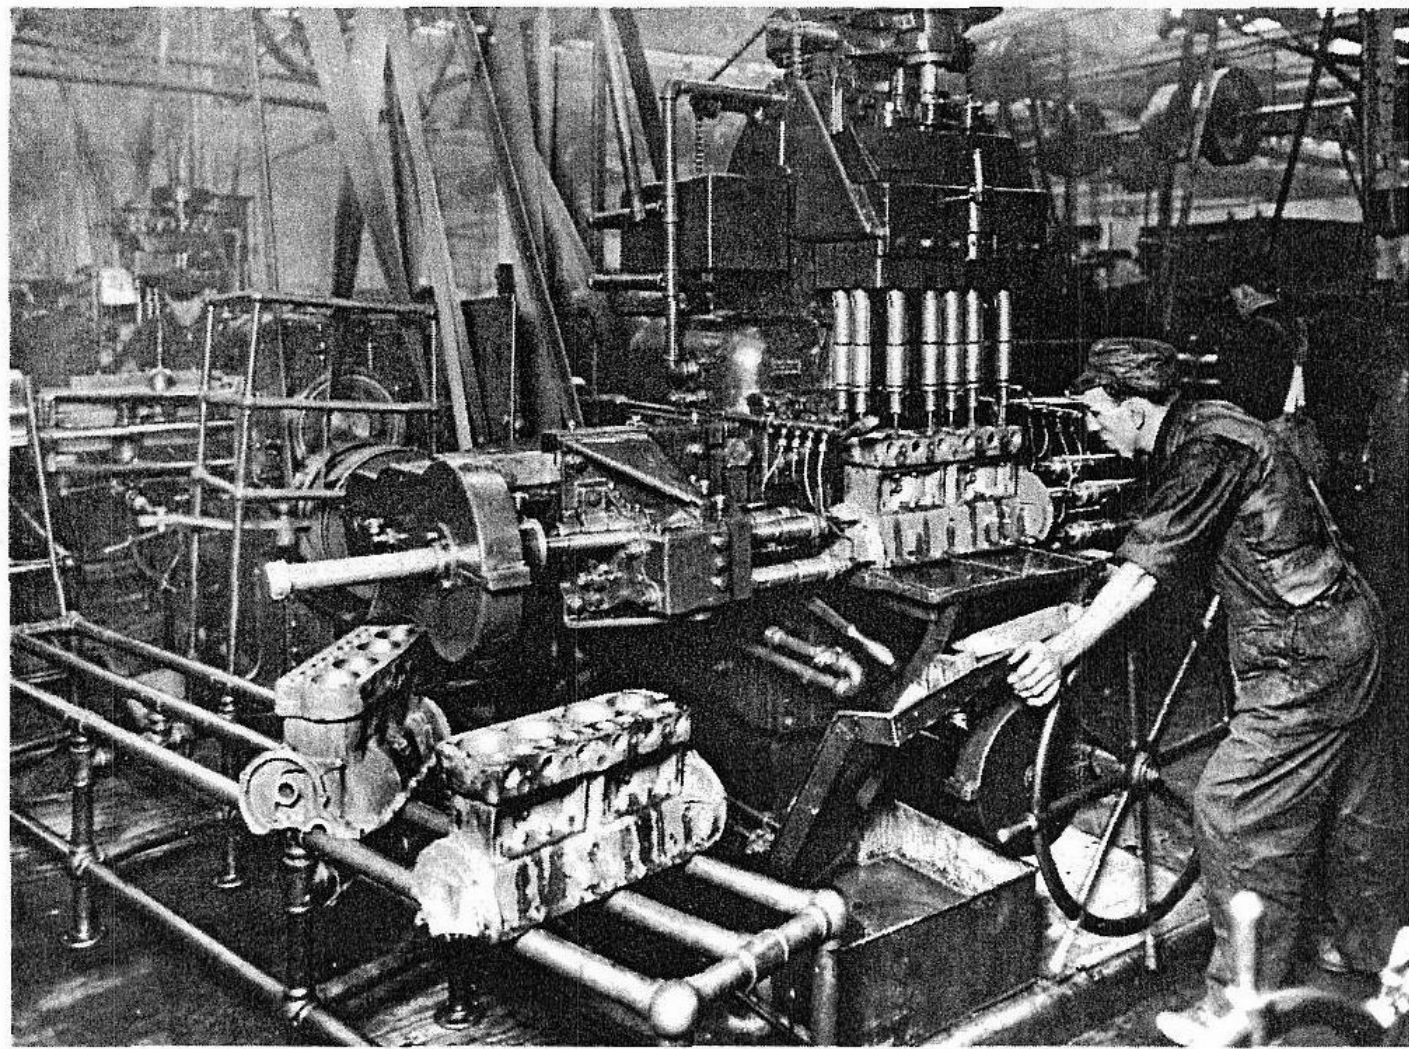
Drilling and Reaming Engine Block, 1913. This is one example of multiple spindle drilling and reaming machinery designed to machine the Model T engine block. (Henry Ford Museum, The Edison Institute, Neg. No. 833-219.)
